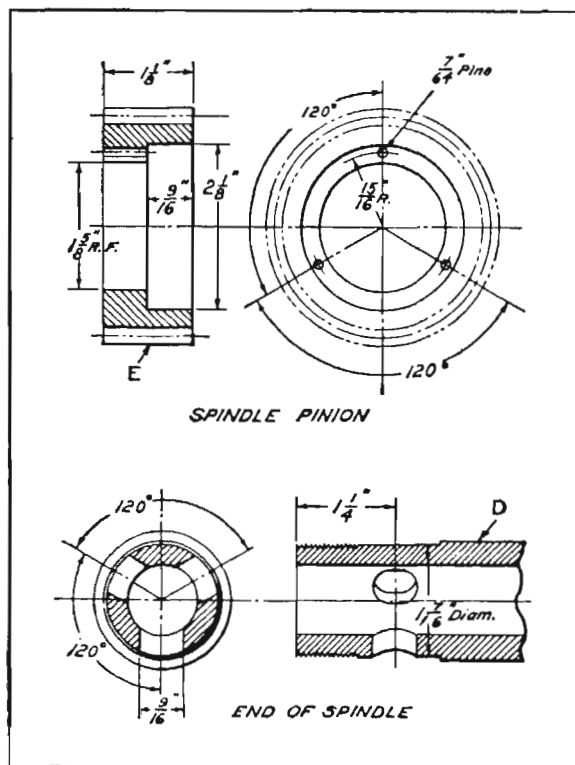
Details of Spindle Pinion E and the Driven End of Spindle D in Fig. 11.
